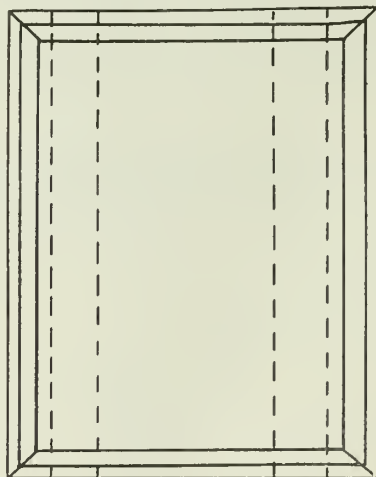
BOARDS FOR SQUEEZING MACHINE.
